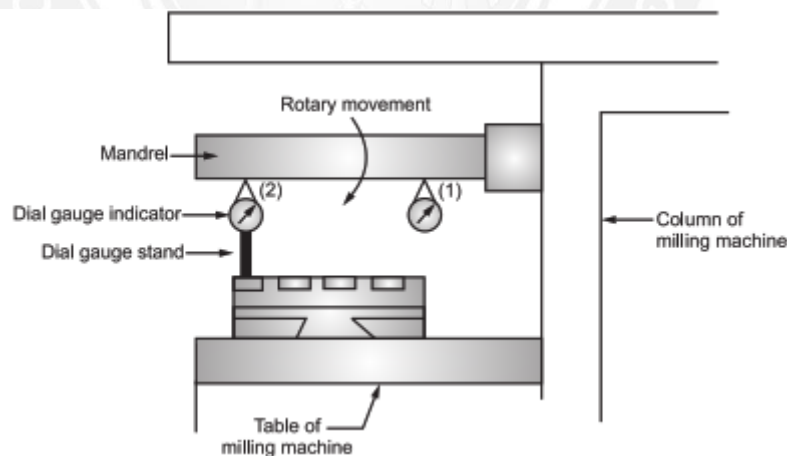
Transverse Movement Parallelism with Spindle Axis
